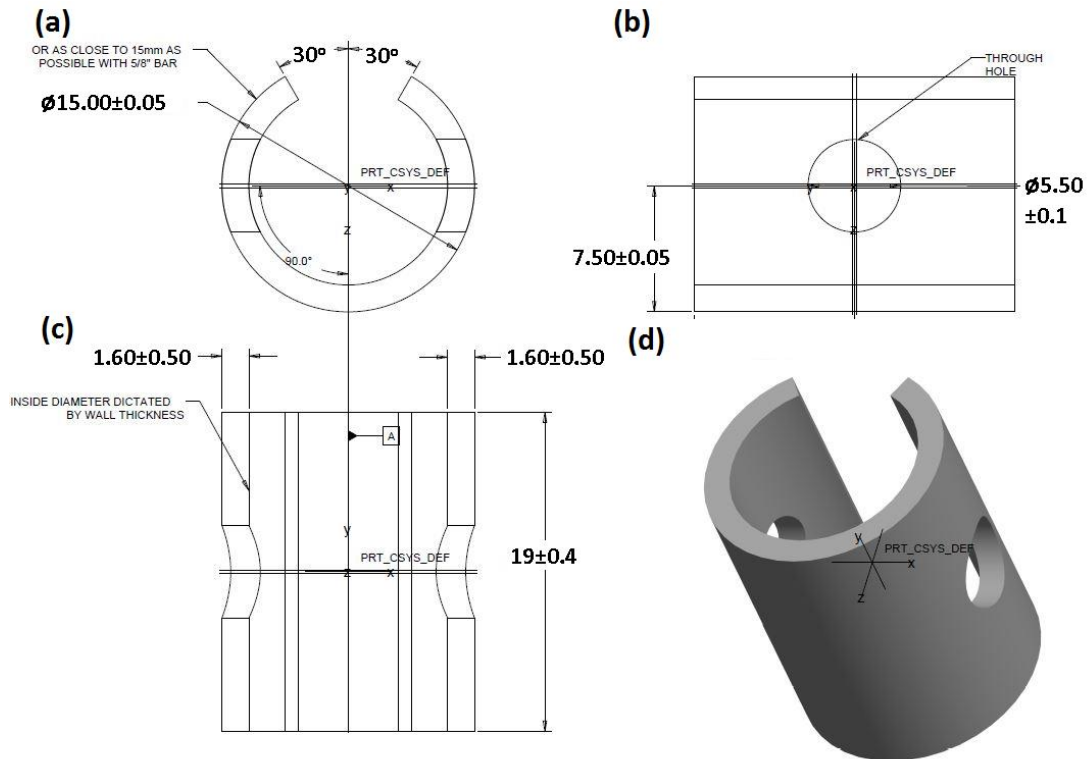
C-ring specimen geometry as established from ISO 7539-5 (a) frontal cross section (b) top view cross section (c) side view cross section (d) isometric view
